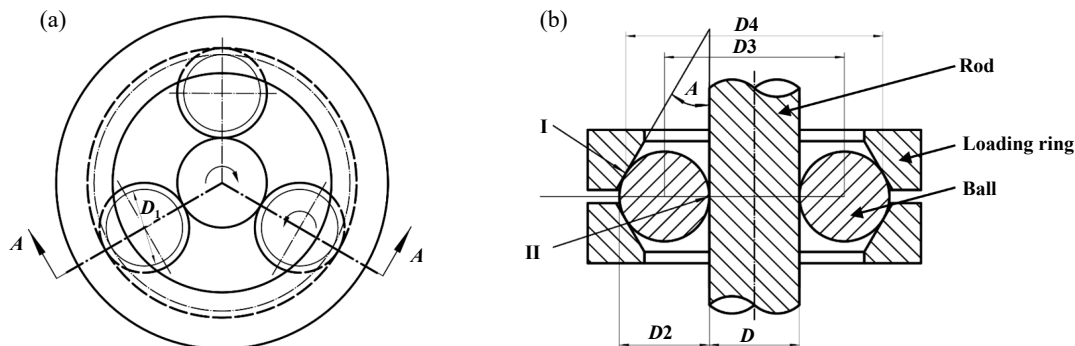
Schematic diagram of the ball-on-rod rolling contact fatigue testing machine: (a) top view structure of the contact area; (b) cross-sectional structure
